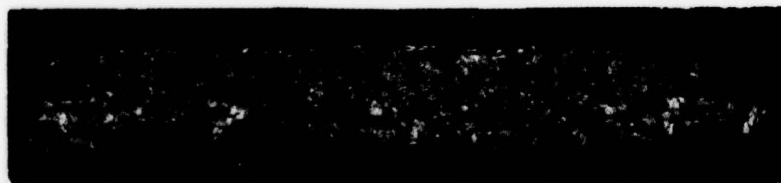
FRACTURE INTERFACE OF BEND TEST COUPON S/N 8-3.
